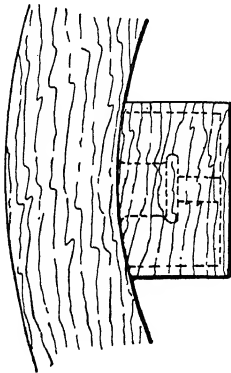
Segmental Piece for Rim of Fly-wheel
